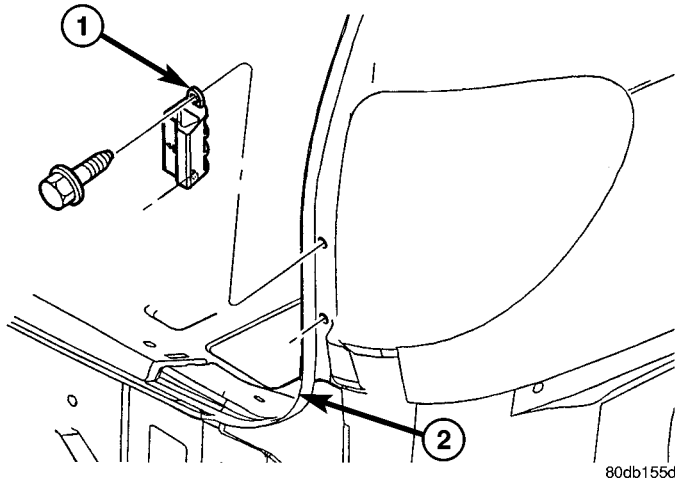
LIFTGATE STOP BUMPER - BODY SIDE
